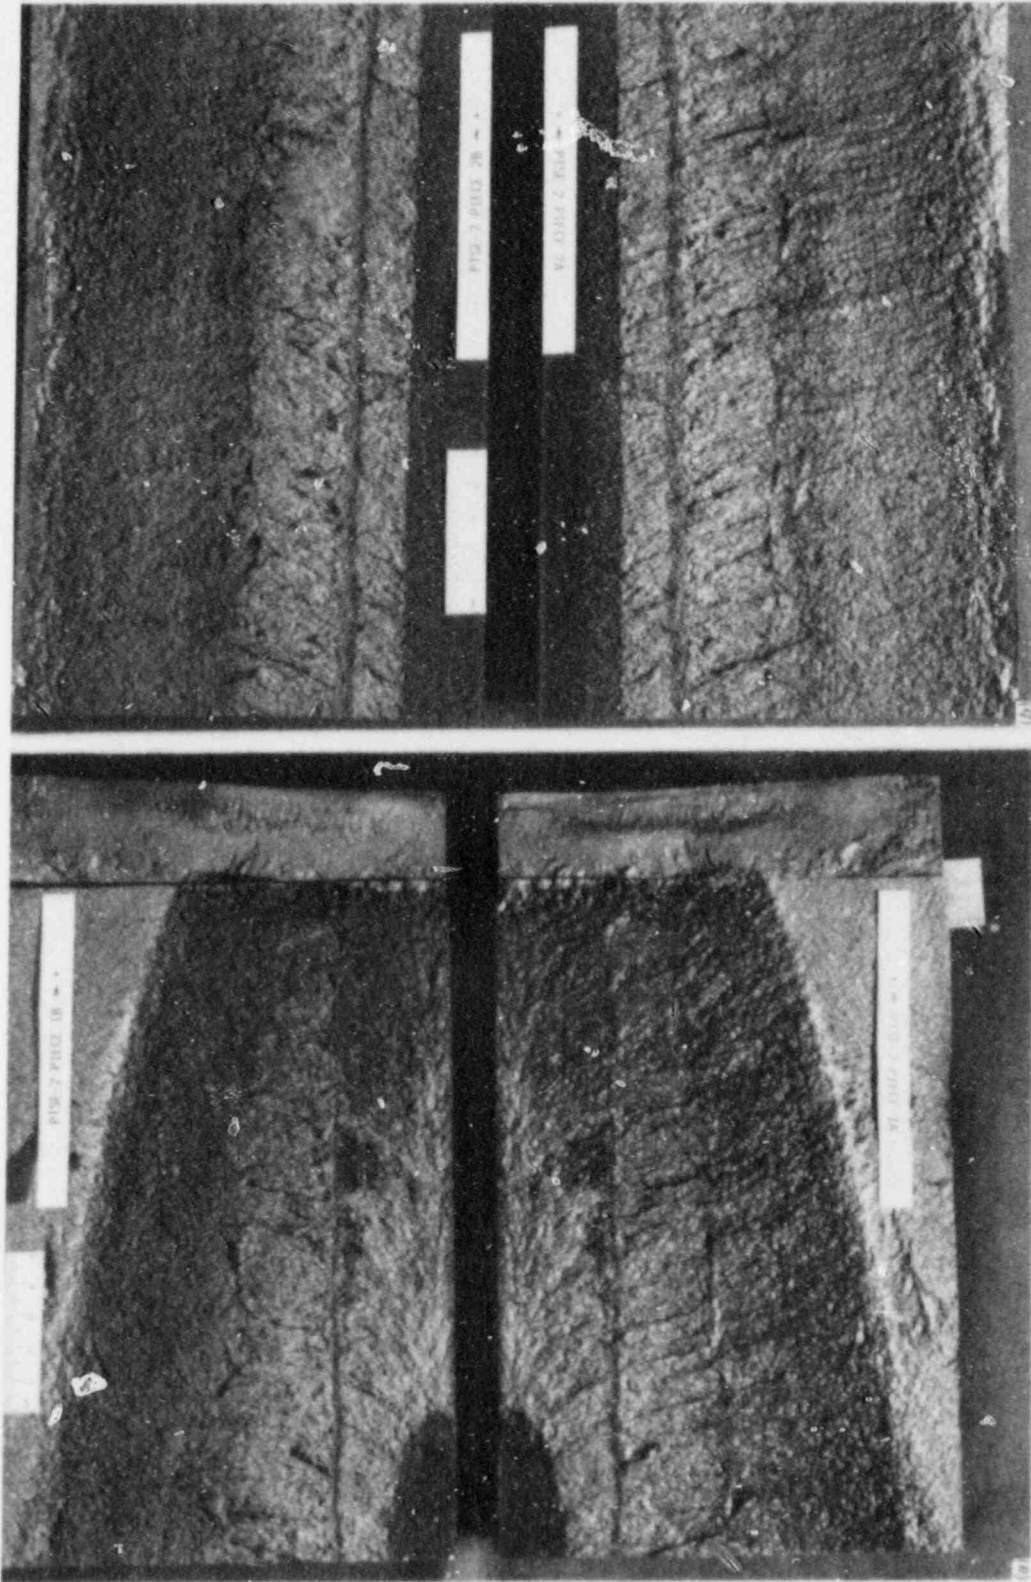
Photographs of mating fracture surfaces in (a) segment 1 and (b) segment 2.
